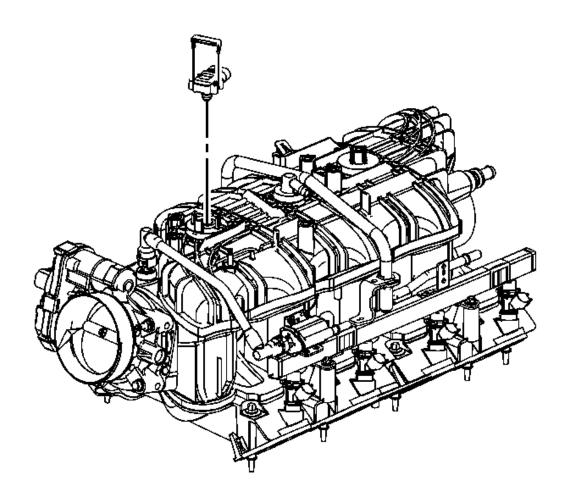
View Of MAP Sensor & Retainer Courtesy of GENERAL MOTORS CORP.
